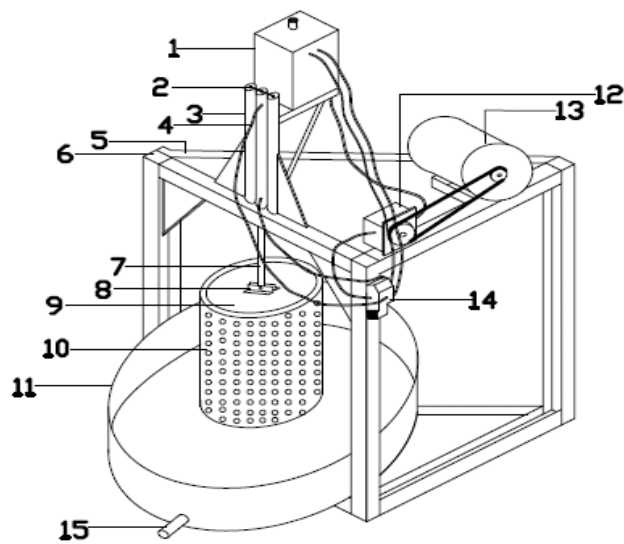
Diagram of the Motorized Hydraulically Operated Palm Oil Press.
